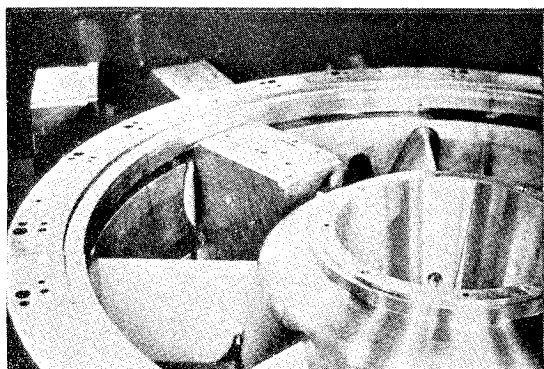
Wax pattern tooling; F100 intermediate compressor case tooling.
